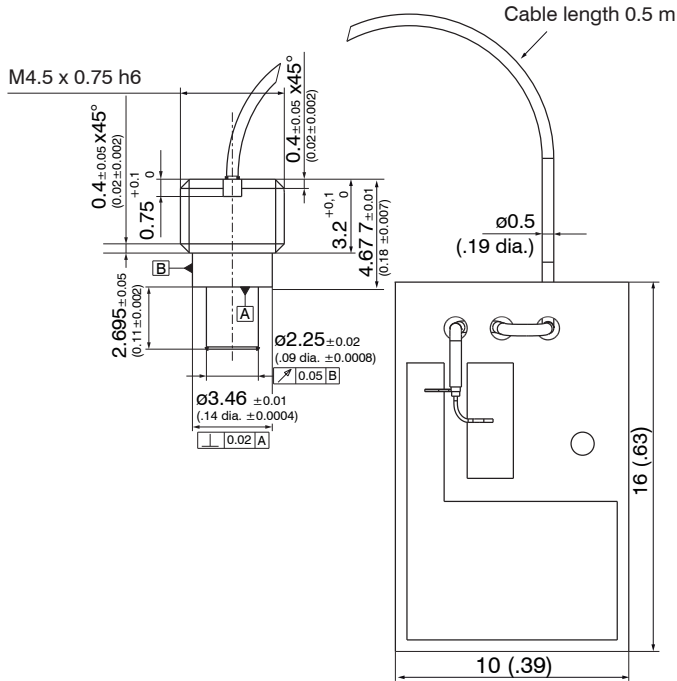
Sensor dimensions LS04(01) with integrated sensor cable, dimensions in mm (inches), not to scale
